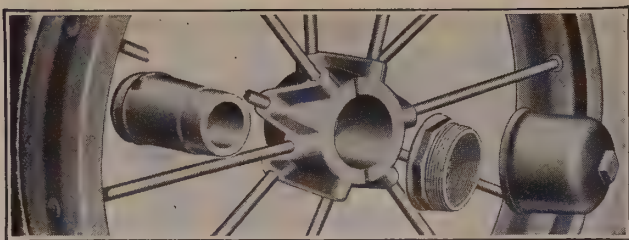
This detail shows a section of the front wheel with wheel boxing, nut and cap removed. When worn, boxing can be replaced at small cost.
